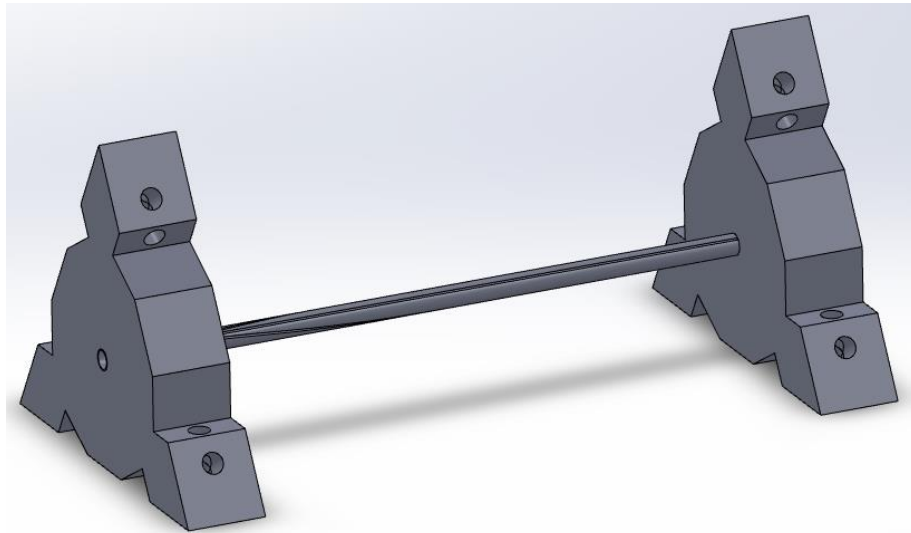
Triangle jig assembly for sensor slot micro-machining.
